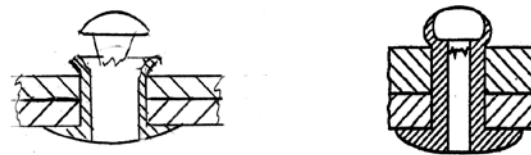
illustrates the failure of the set blind rivet when the length of the rivet body is too long for the work thickness.
